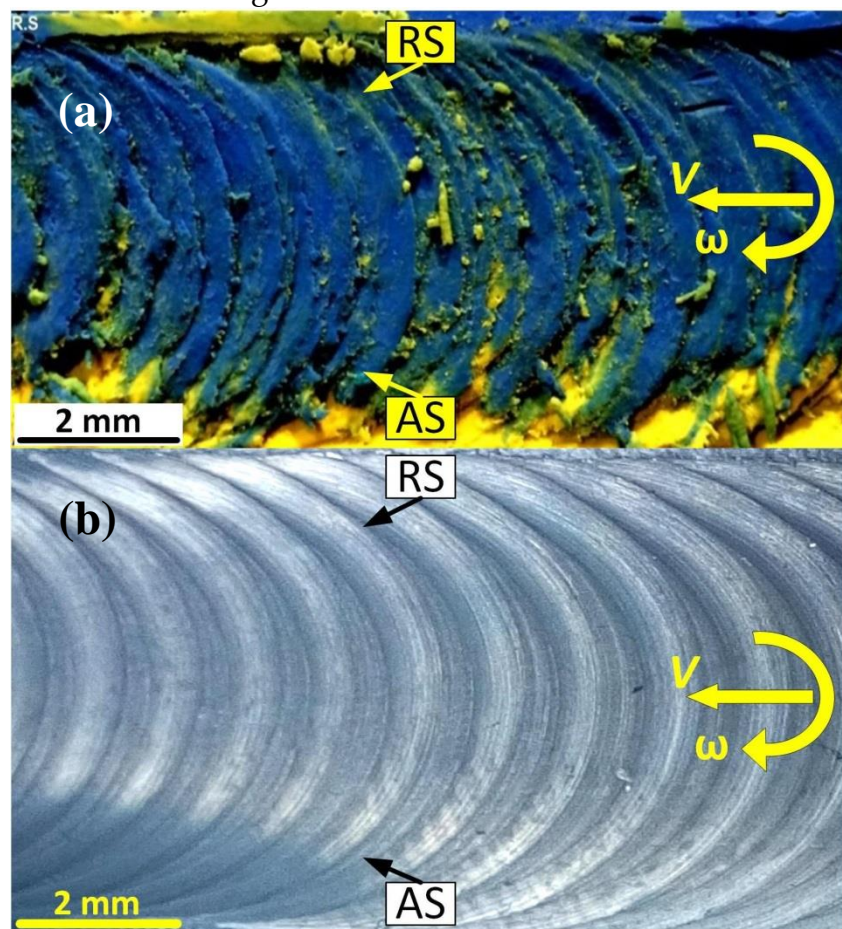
In-situ model of the surface pitch ripples as the surface pattern through the weld-line; (a) plasticine analogue, (b) aluminium weld surface.
